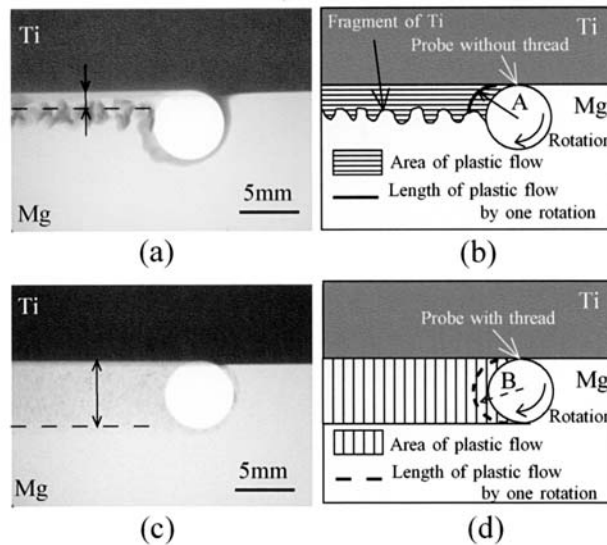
X-ray photographs to explain the difference of plastic flow of Mg using a probe with thread and without thread (a cylindrical probe). Photo (a): X-ray photograph using a probe without thread (a cylindrical probe) and Photo (c): X-ray photograph using a probe with thread. Schematic illustration (b) and (d) correspond X-ray photographs (a) and (c), respectively.
